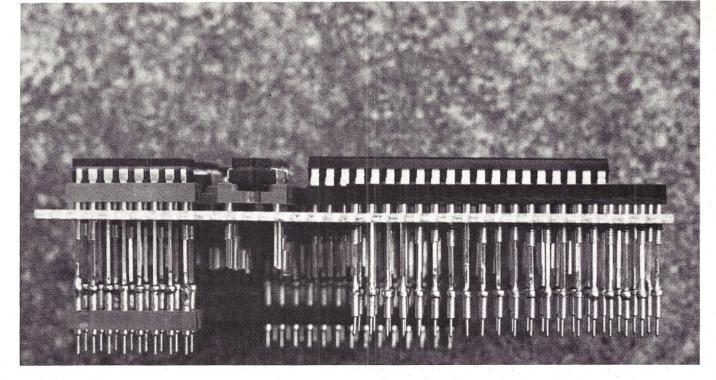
Side view of adapter board shows the frameless socket pins attached to the ends of the wire-wrap pins, using an ordinary
